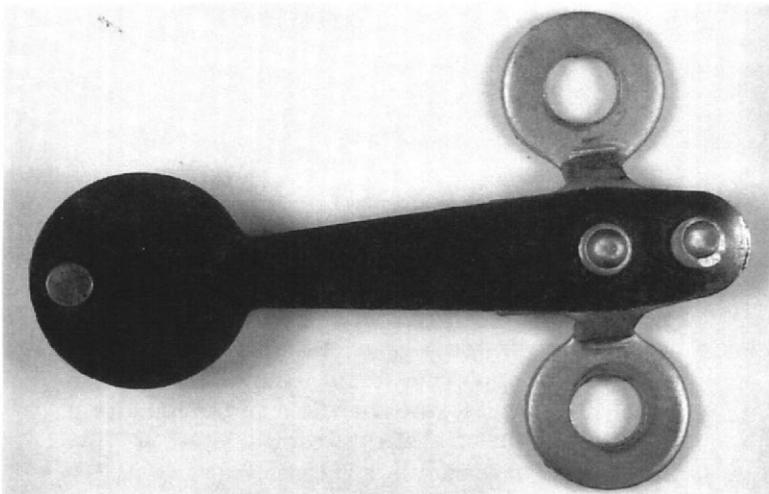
Beginning in mid-April 1924 the vibrator contact spring base was redesigned. The two mounting screws were replaced by riveting the vibrator spring directly to the base. Thereafter, both the base and the spring would have to be replaced as a unit.
